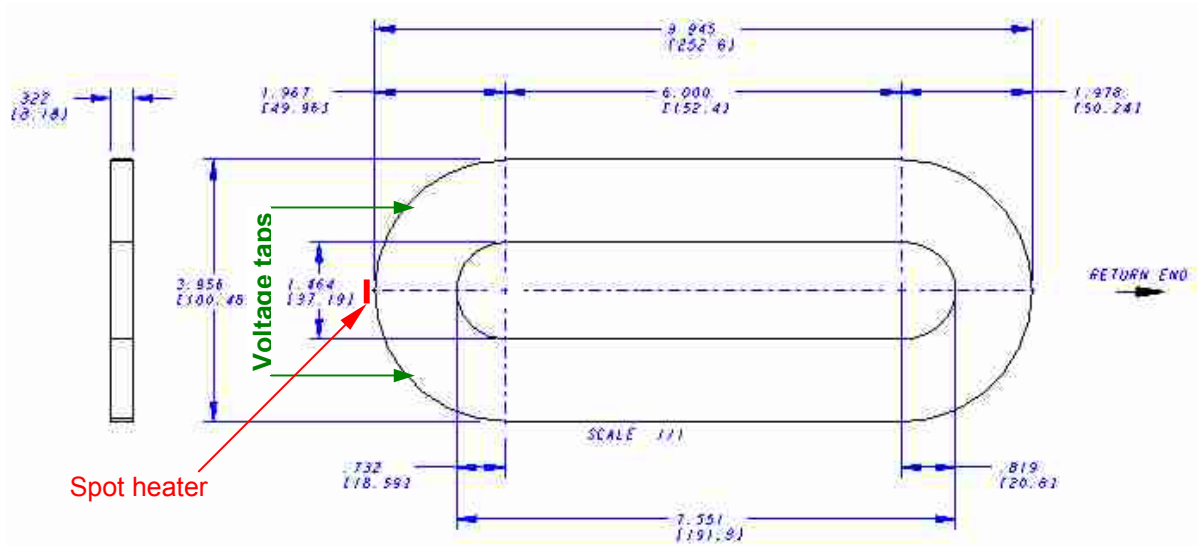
Coil geometry (all dimensions in inches [mm] ).
